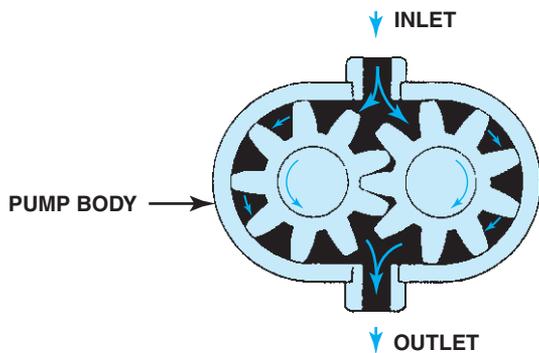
In a gear-type oil pump, the oil flows through the pump around the outside of each gear. This is an example of a positive displacement pump, wherein everything entering the pump must leave the pump.
